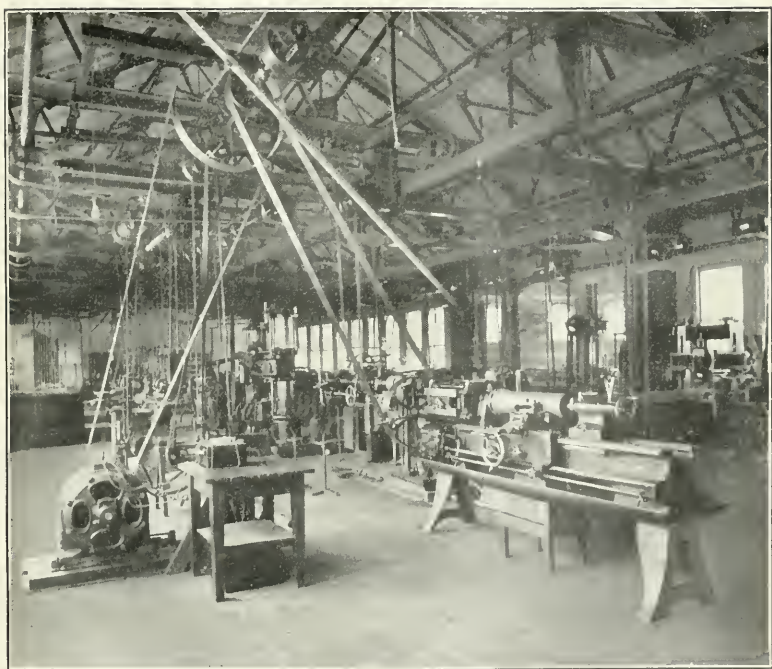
VIEW IN THE UNIVERSITY OF ILLINOIS MACHINE SHOP SHOWING LOCATION OF LATHE AND MOTOR DRIVE USED IN TESTS WITH HIGH-SPEED TOOL STEELS
